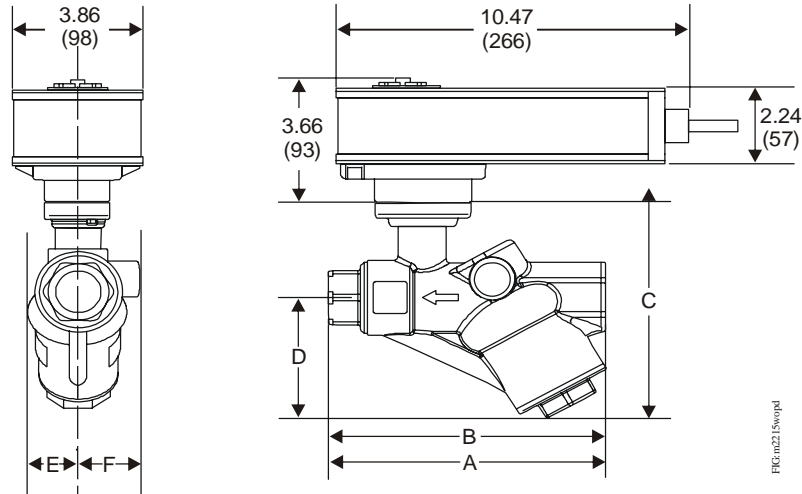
M2215 Actuated P1000 Pressure Independent Valve without Pressure Taps Dimensions, in. (mm)
